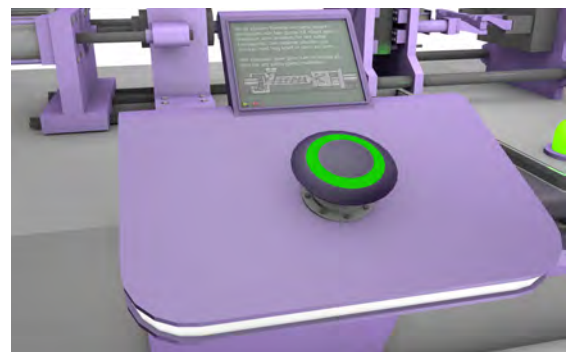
When the Injektor is ready to mold a new part, the button will light up green.
